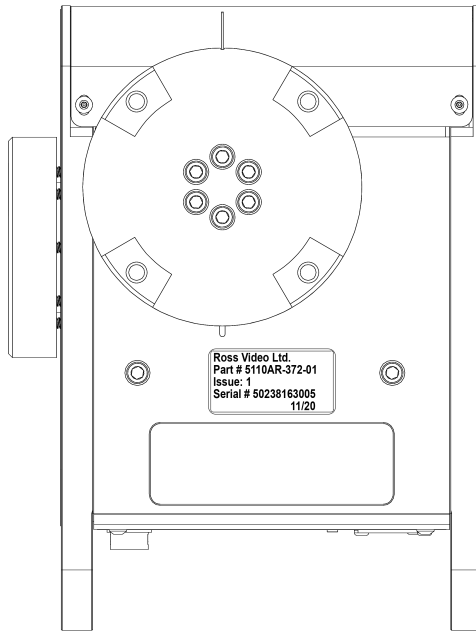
X300 Pan & Tilt Head (bottom view, camera cradle not shown)
